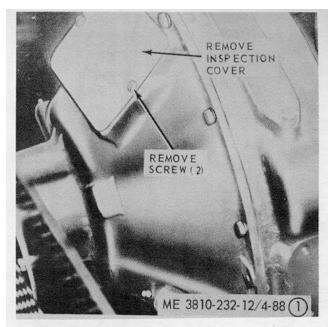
Crane engine clutch adjustment. Sheet 1 of2.
